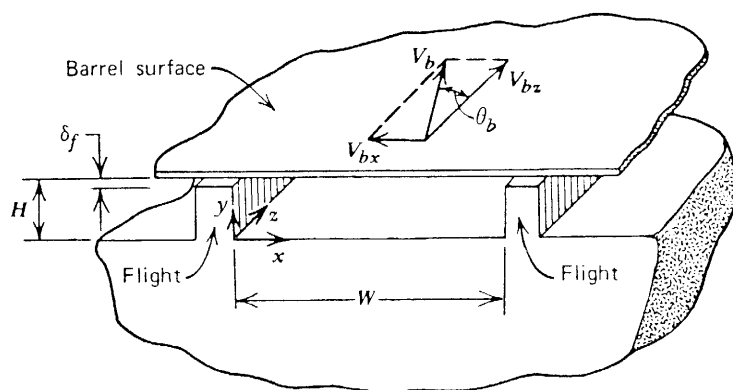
Schematic of unwound single-screw extruder geometry. (From Ref. 1.)
